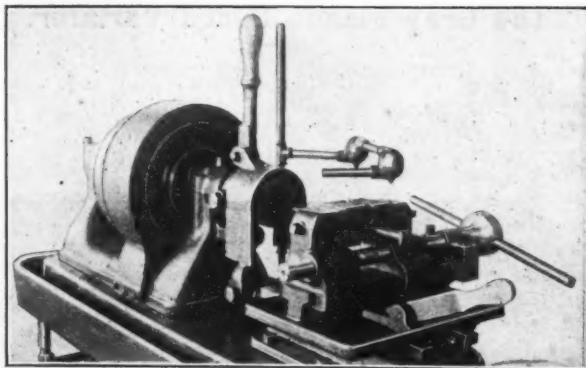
Bolt Threading, Using a Die in Place of the Tap Chuck.
